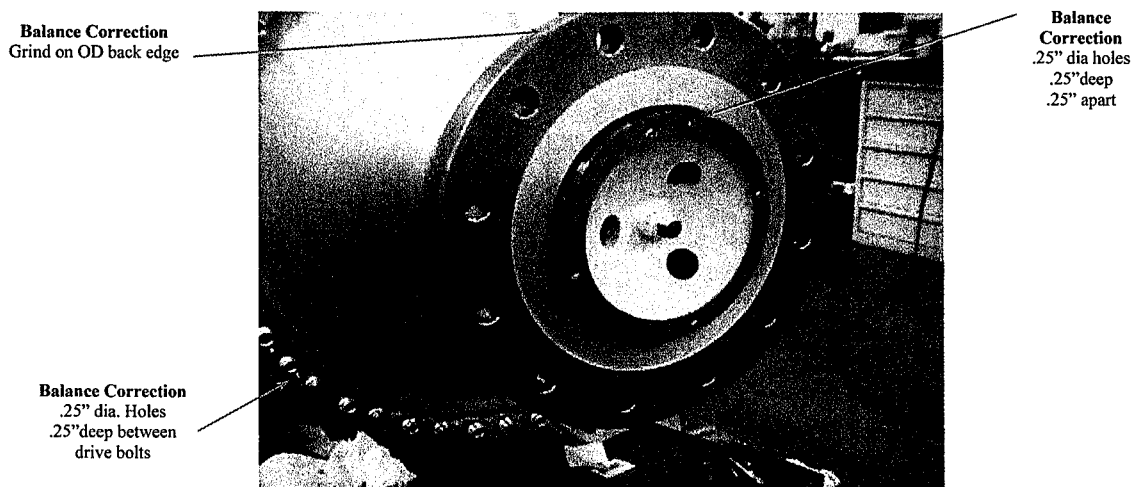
Weight Removal Location for Forward Sub Assembly Balance
